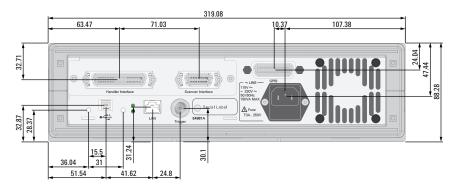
Dimensions (rear view, without handle and bumper, in millimeters, nominal)
